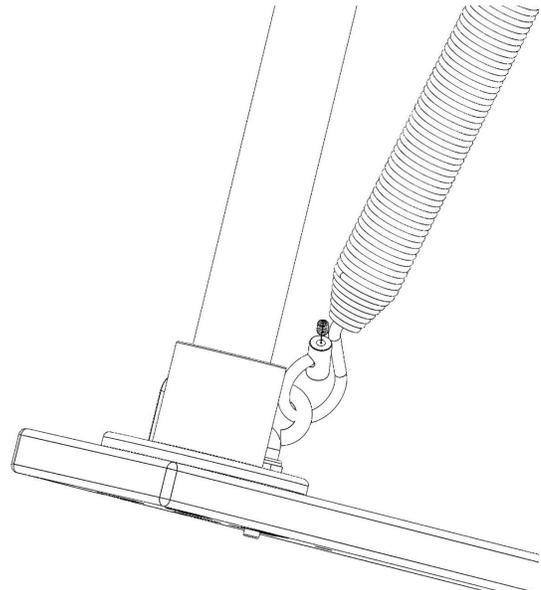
Figure F. Picture showing set screw installed into the wire stop and installed onto spring.
